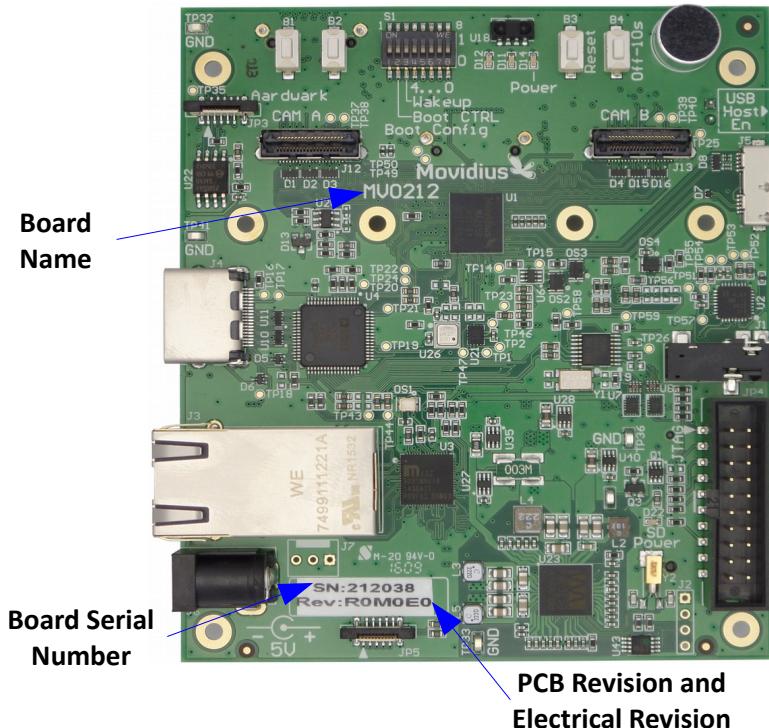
Identifying PCB Revision and Serial Number (MV0212-R0)
